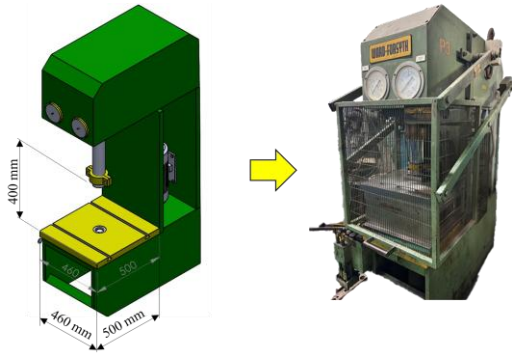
Ward-Forsyth VO30E/10 hydraulic press machine
